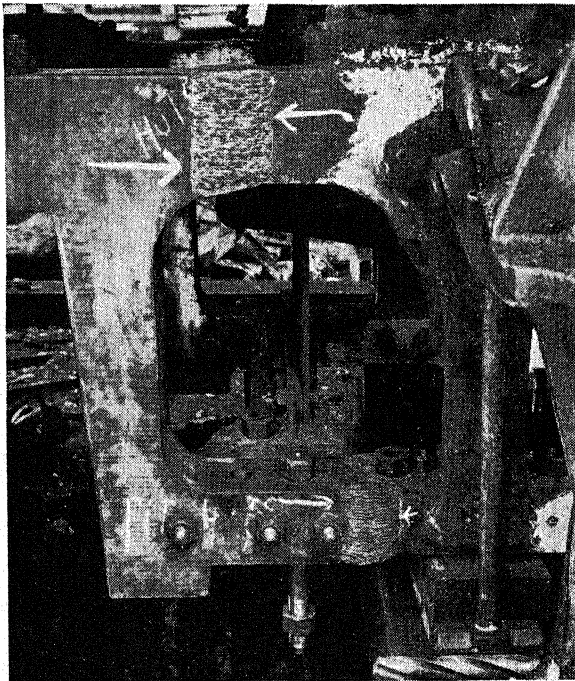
New section of locomotive frame arc welded to old.
